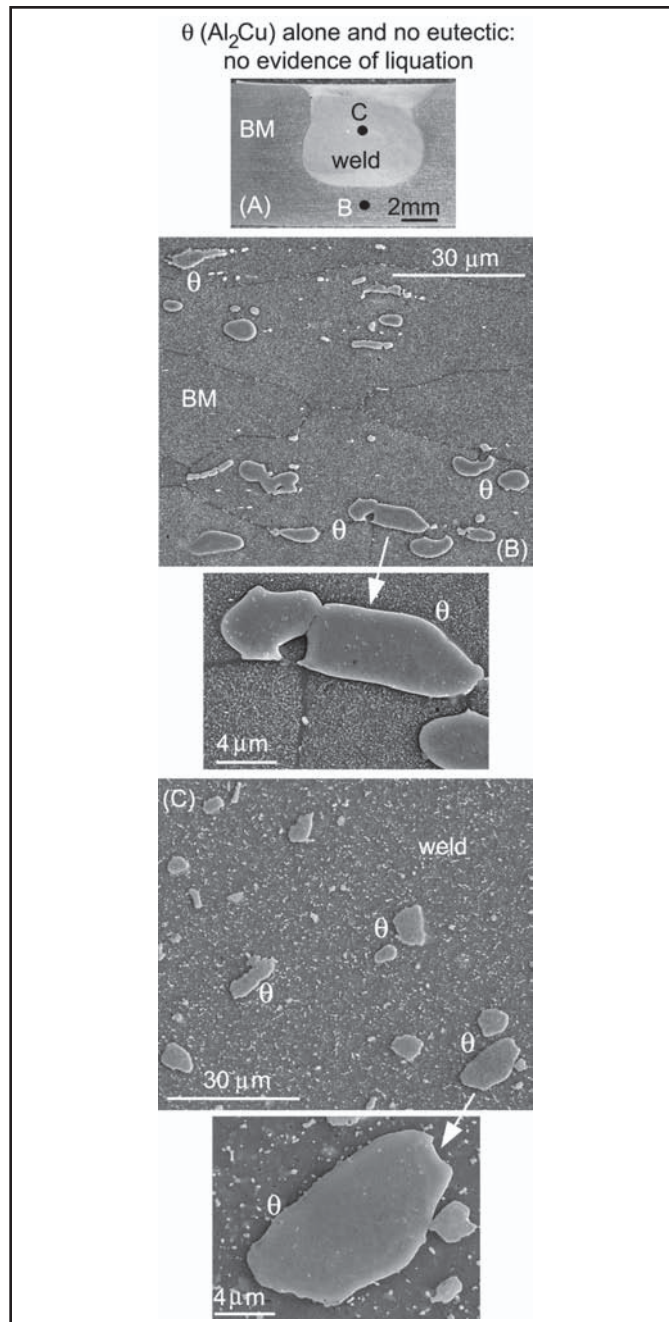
Transverse cross section of a friction stir weld. A — Macrograph; B — SEM image outside weld at point B in A; C — SEM image inside weld at point C in A showing no evidence of liquation in the weld. BM is base metal.
